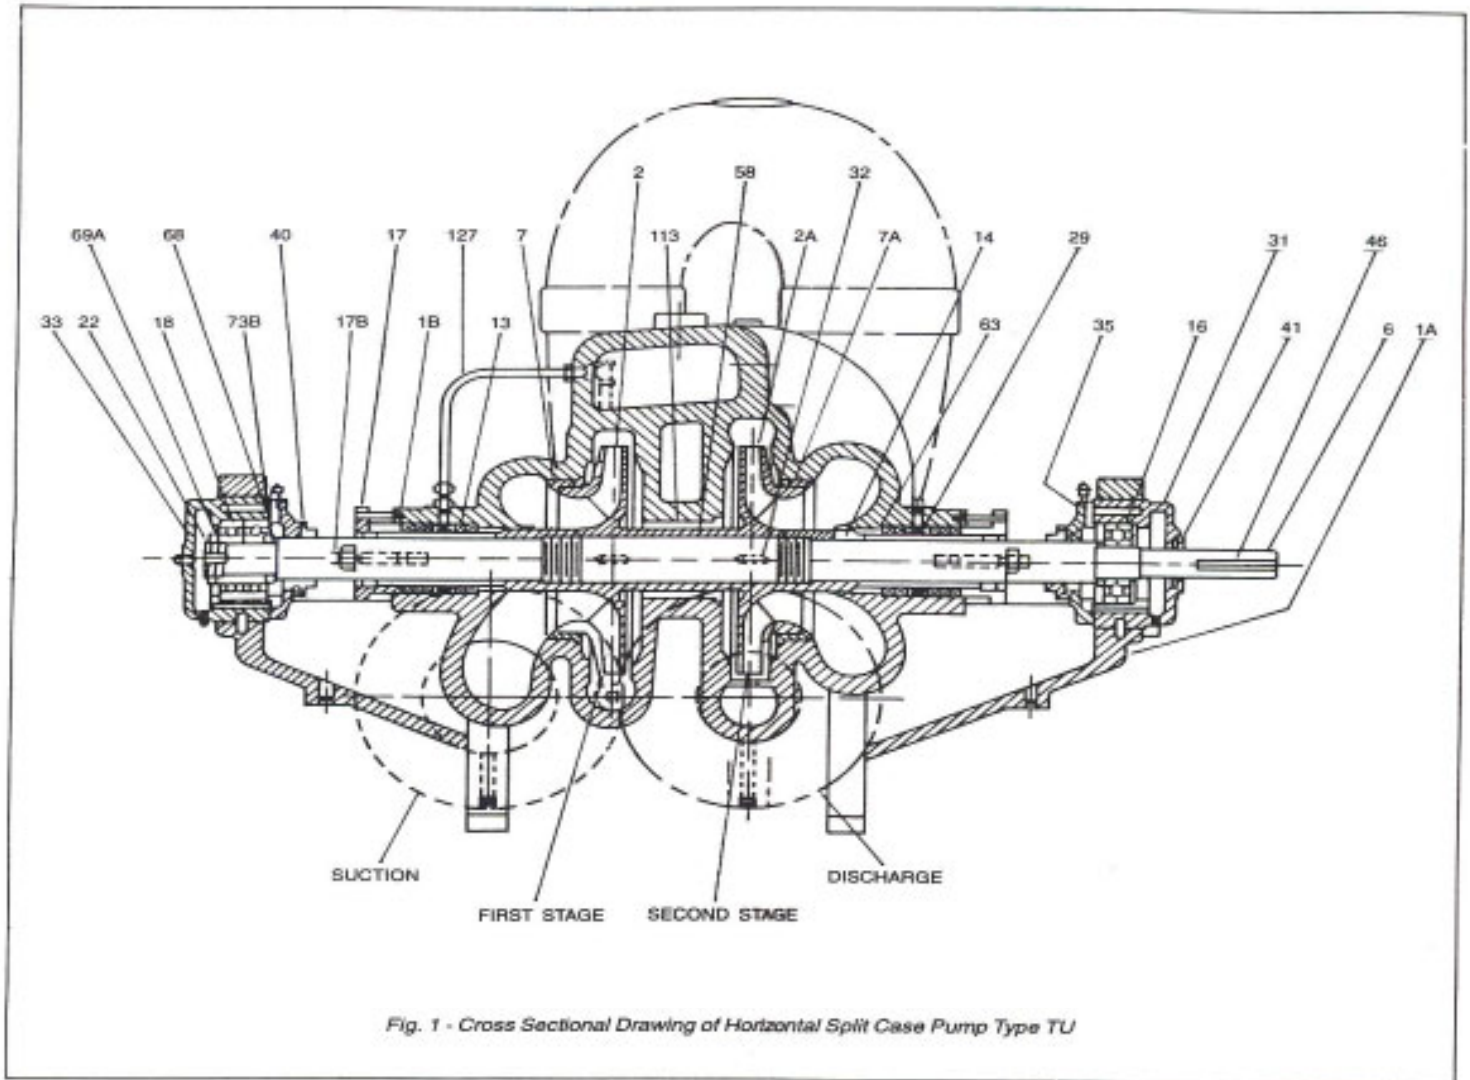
Cross Sectional Drawing of Horizontal Split Case Pump Type TU
